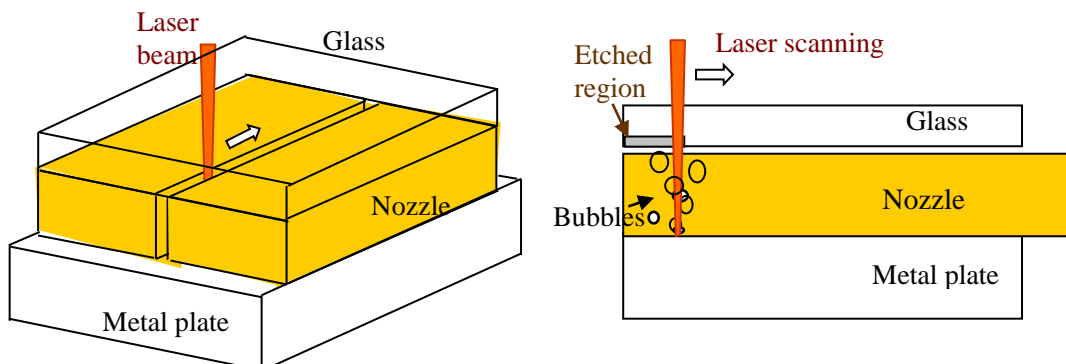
Configuration of the laser line etching system using nozzle-induced bubble jet impact.
